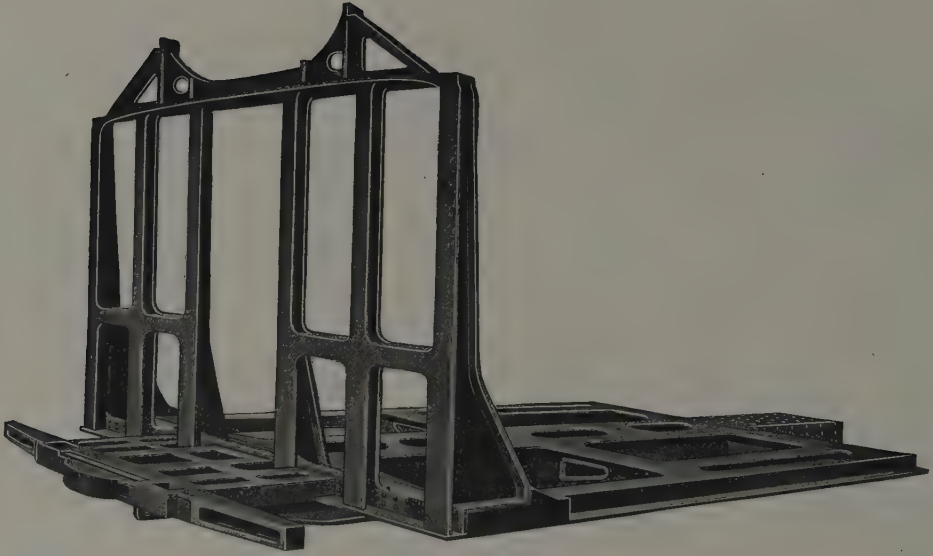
Commonwealth Steel Company's Upright End Frame in One Piece, and Commonwealth Combined Platform and Double Body Bolster for Vestibuled Cars.
